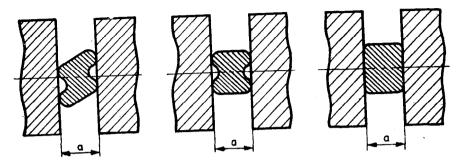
EXAMPLES OF POSITION OF NON-CIRCULAR TEST PIECES
